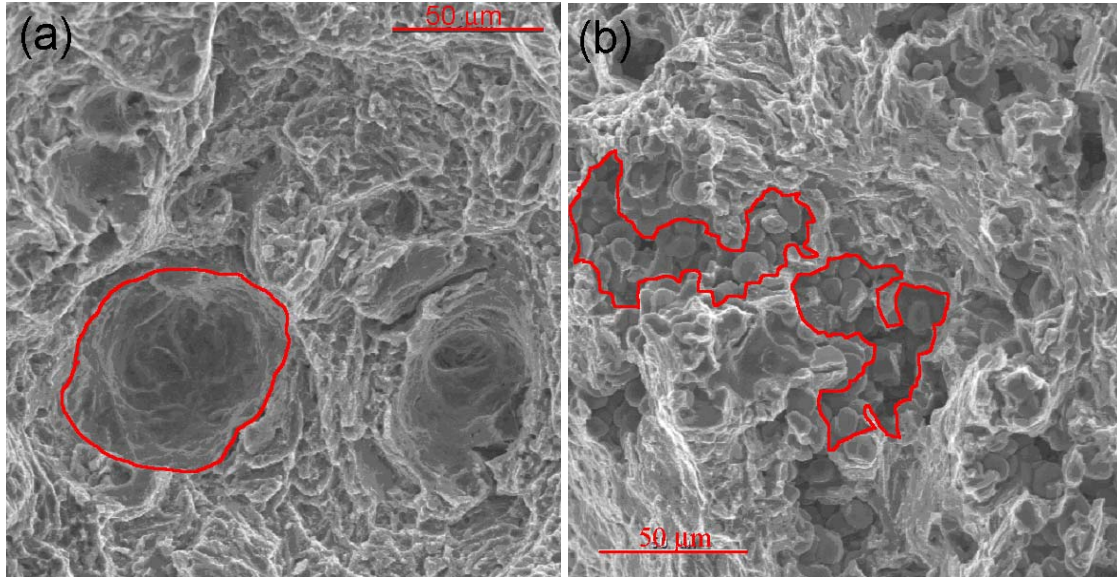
Typical SEM fractographs of a tensile fracture surface.
